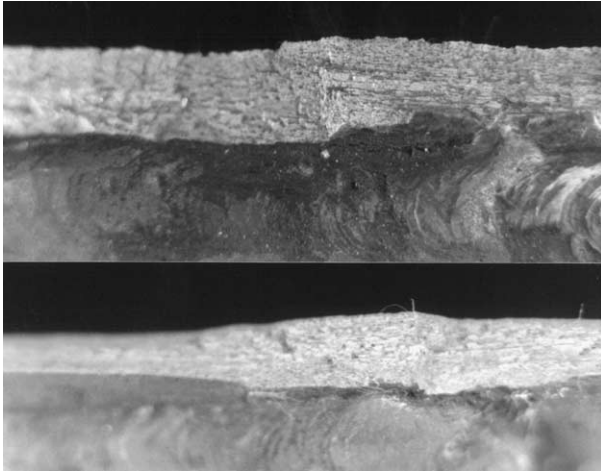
($\times 5$) Detail of the fracture in pipe 6.
